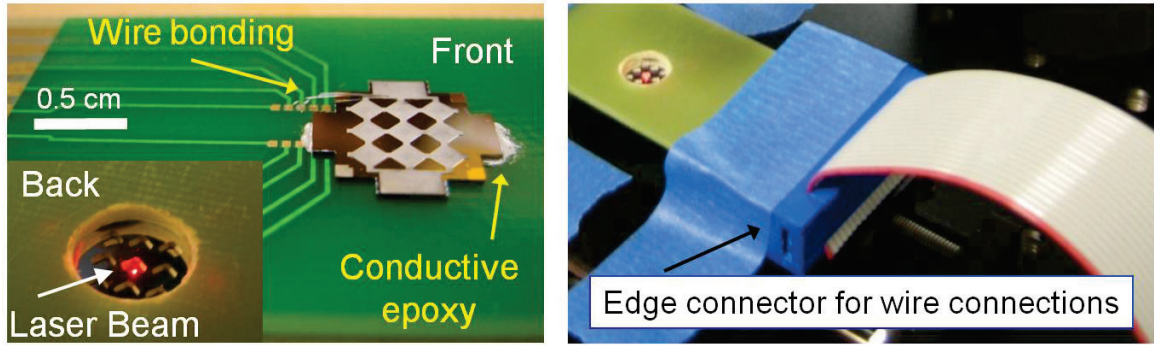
(Left) DUT wired bonded and attached with conductive epoxy on a PCB and (Right) Wire connections made with an edge connector.
